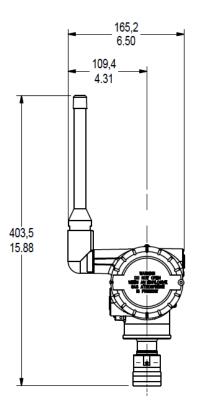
In-Line Gauge, typical mounting dimensions for STGW73L, STGW74L, STGW77L, STGW78L, STGW79L (4 dBi antenna shown, rear view)
